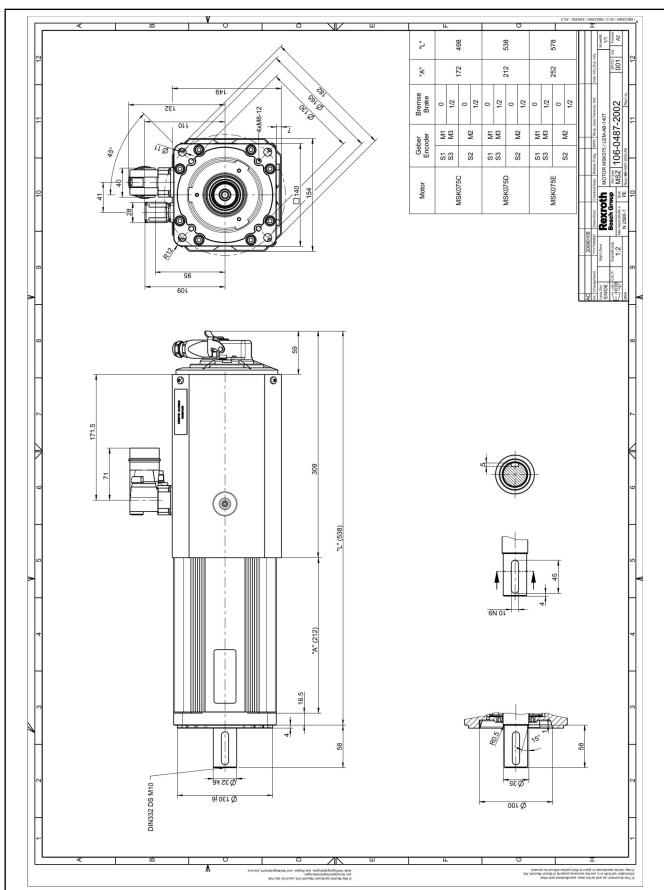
Dimension drawing MSK075 with axial fan unit
